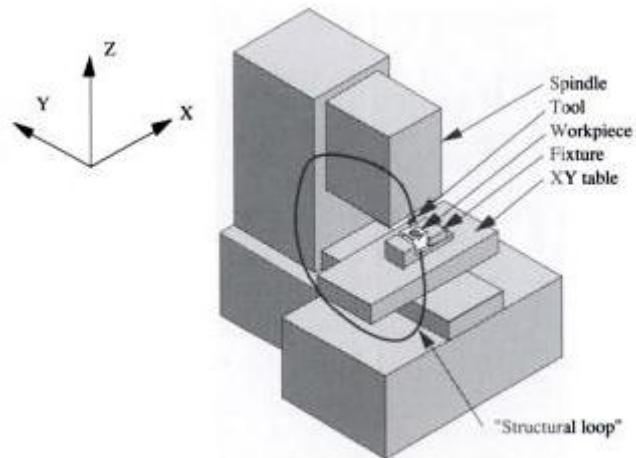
Open frame machine tool structure vertical tool position [17]
